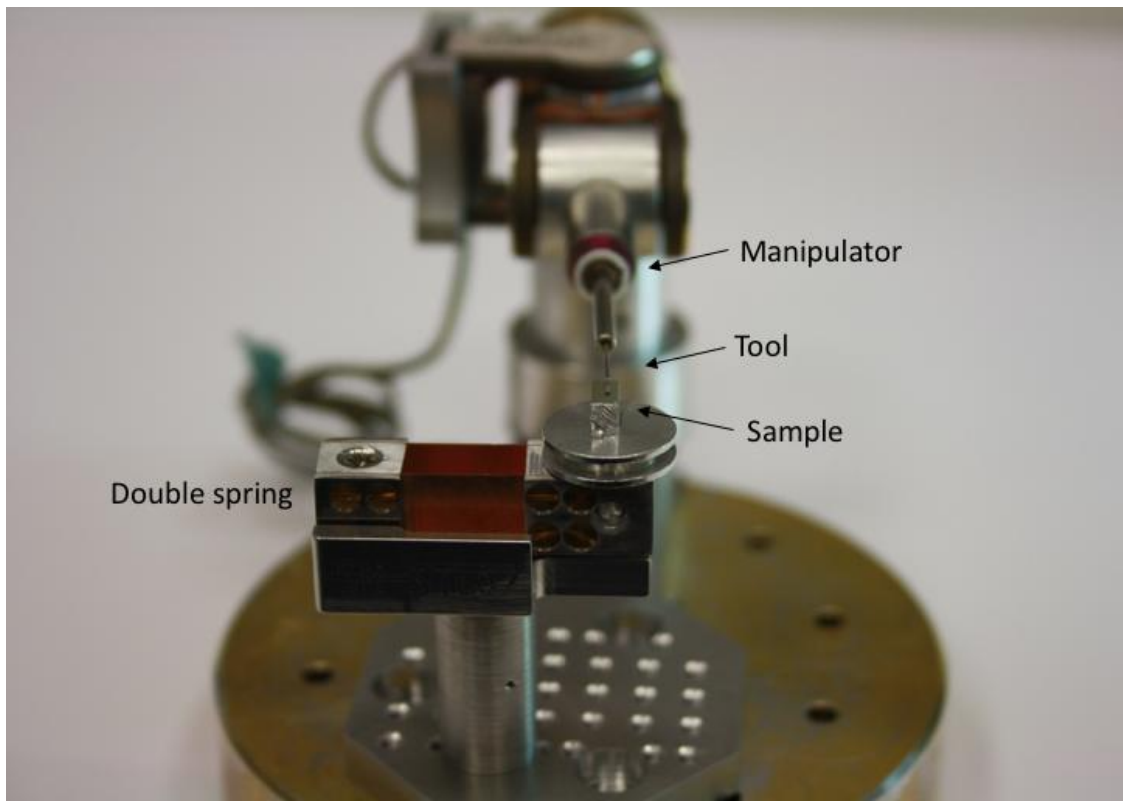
Setup built in position of cutting. It should be noted that the longitudinal axis of the manipulator should be strictly parallel to the workpiece surface, which in turn is perpendicular to the share movement of the double spring.
